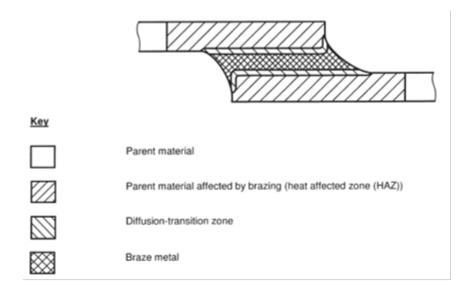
Schematic of a brazed and soldered joint (taken from EN ISO 18279:2004)
